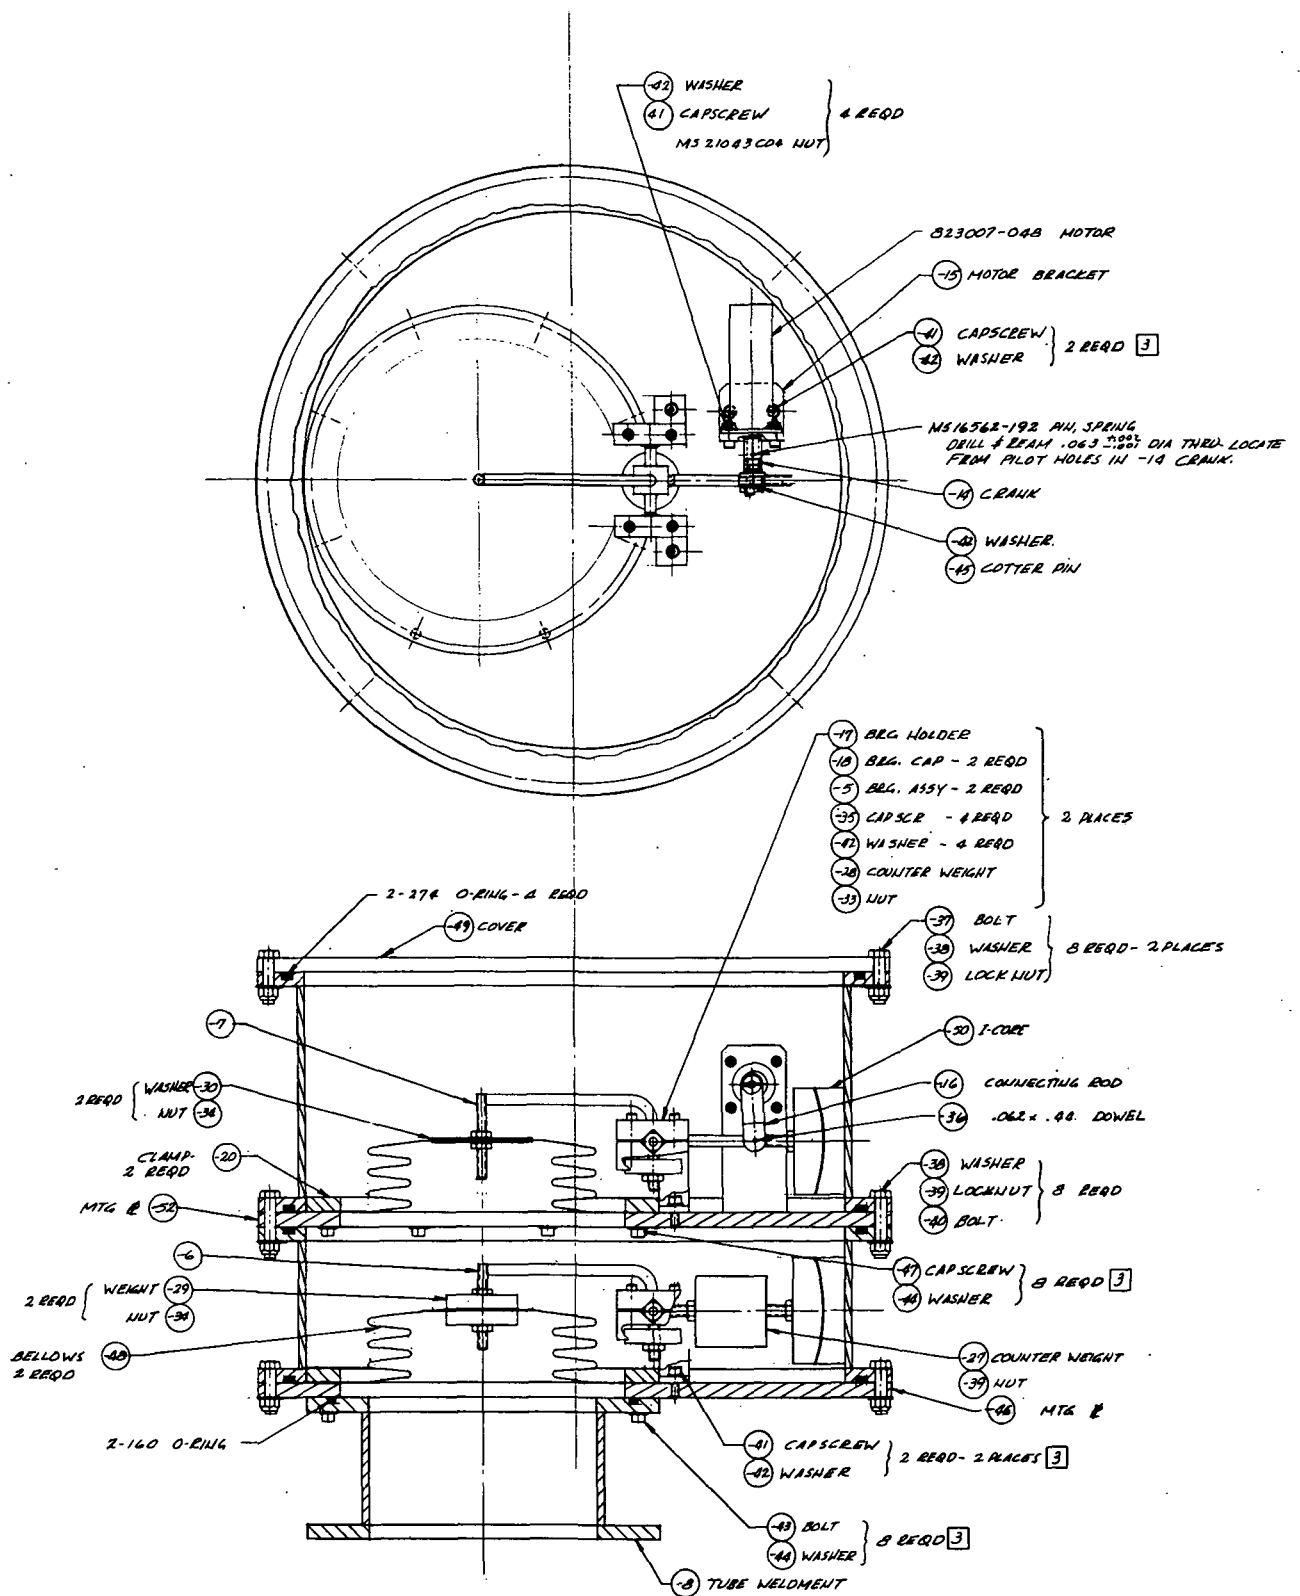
RIGS Sensor Assembly Drawing (Second Sensor)
